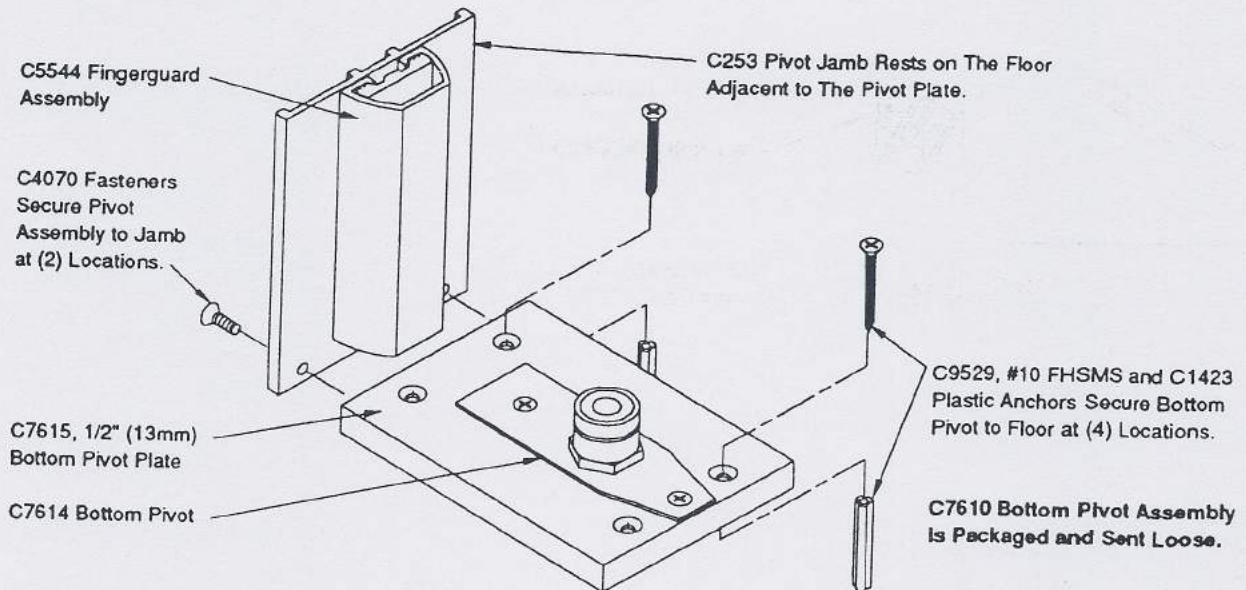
, Attaching C7612 Bottom Pivot Assembly to C300 Jamb
